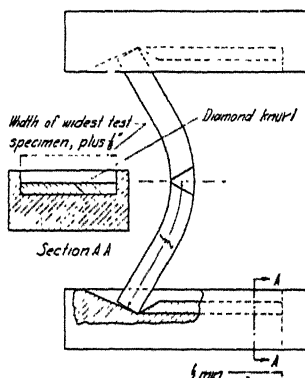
Recommended fixture for final bending of free-bend specimens.
